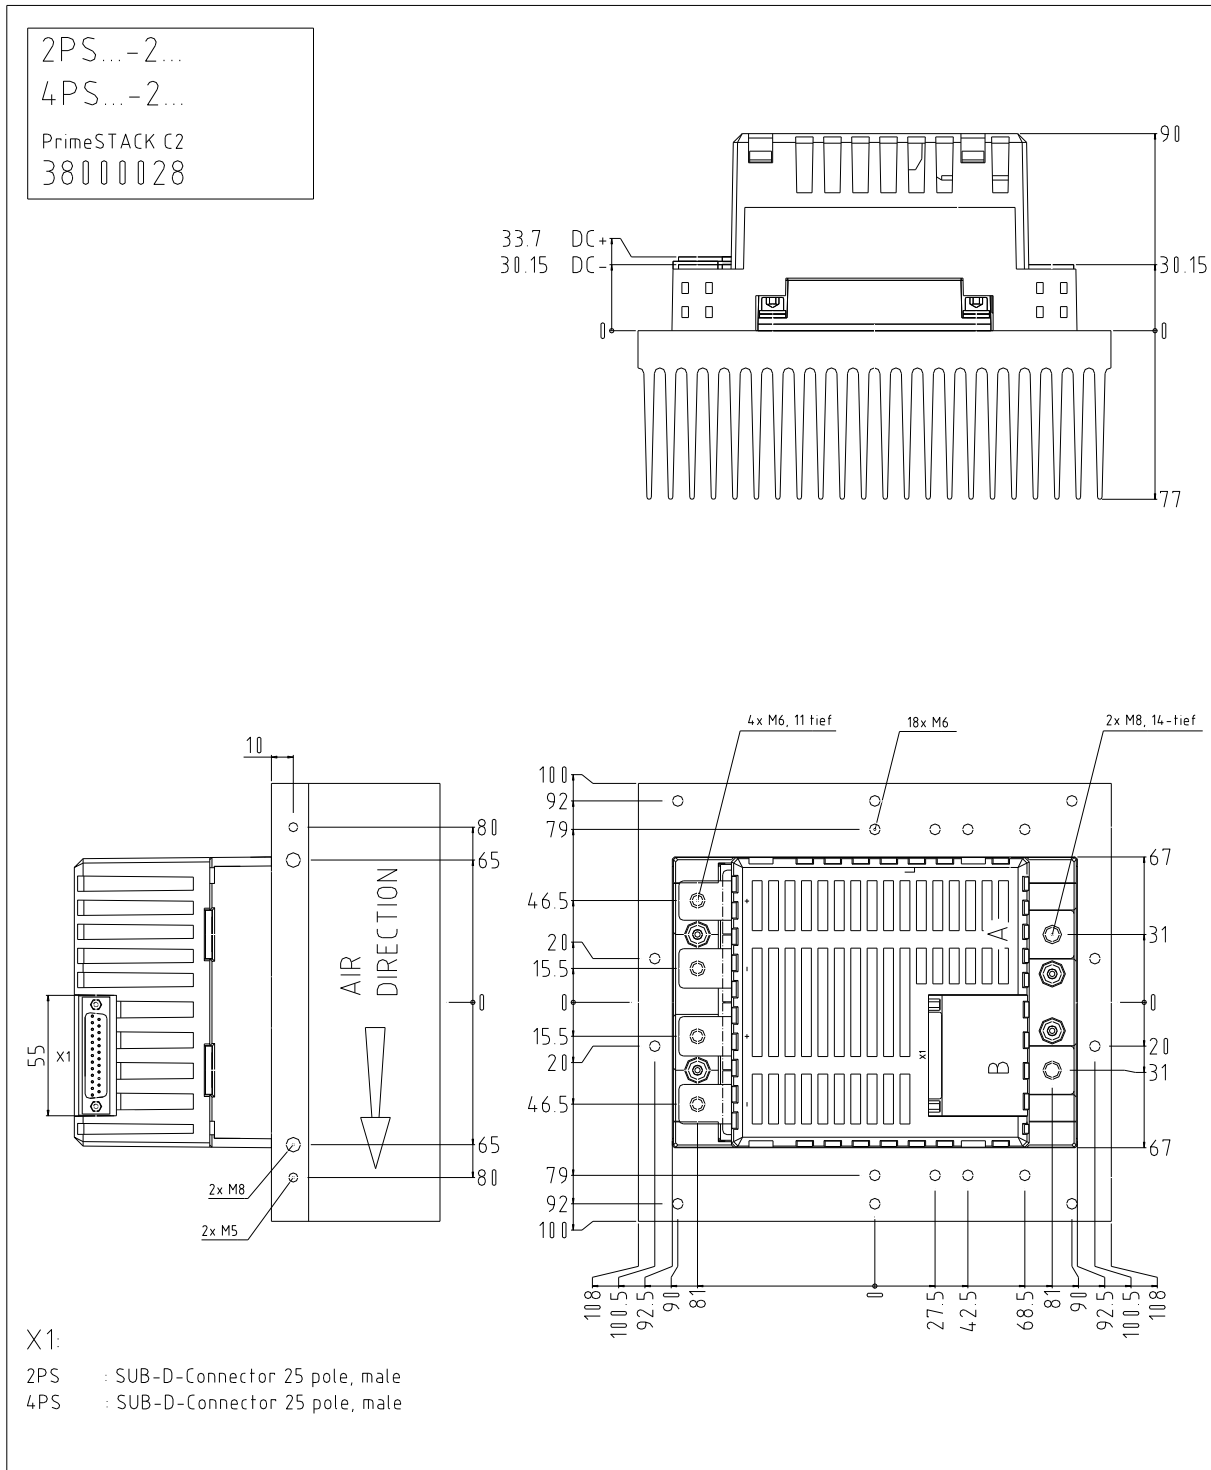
Technical drawing PrimeSTACK in size C2 with air cooler
